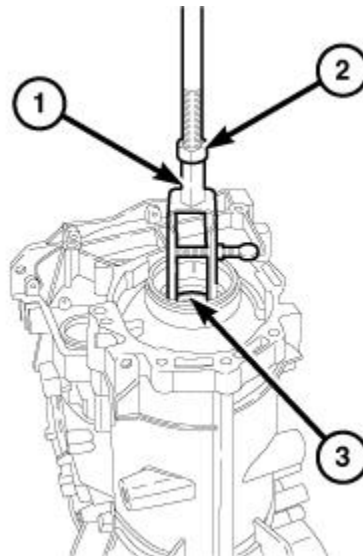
Bearing Cup, Slide Hammer, Universal & Oil Dam
